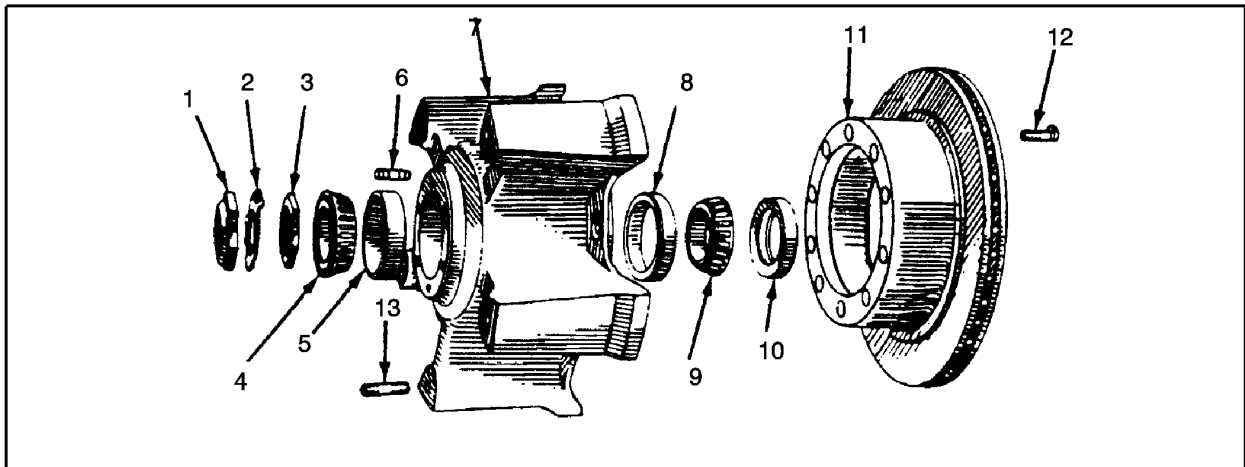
Exploded View of Typical Cast Spoke Rear Hub Assembly with Disc Brakes
